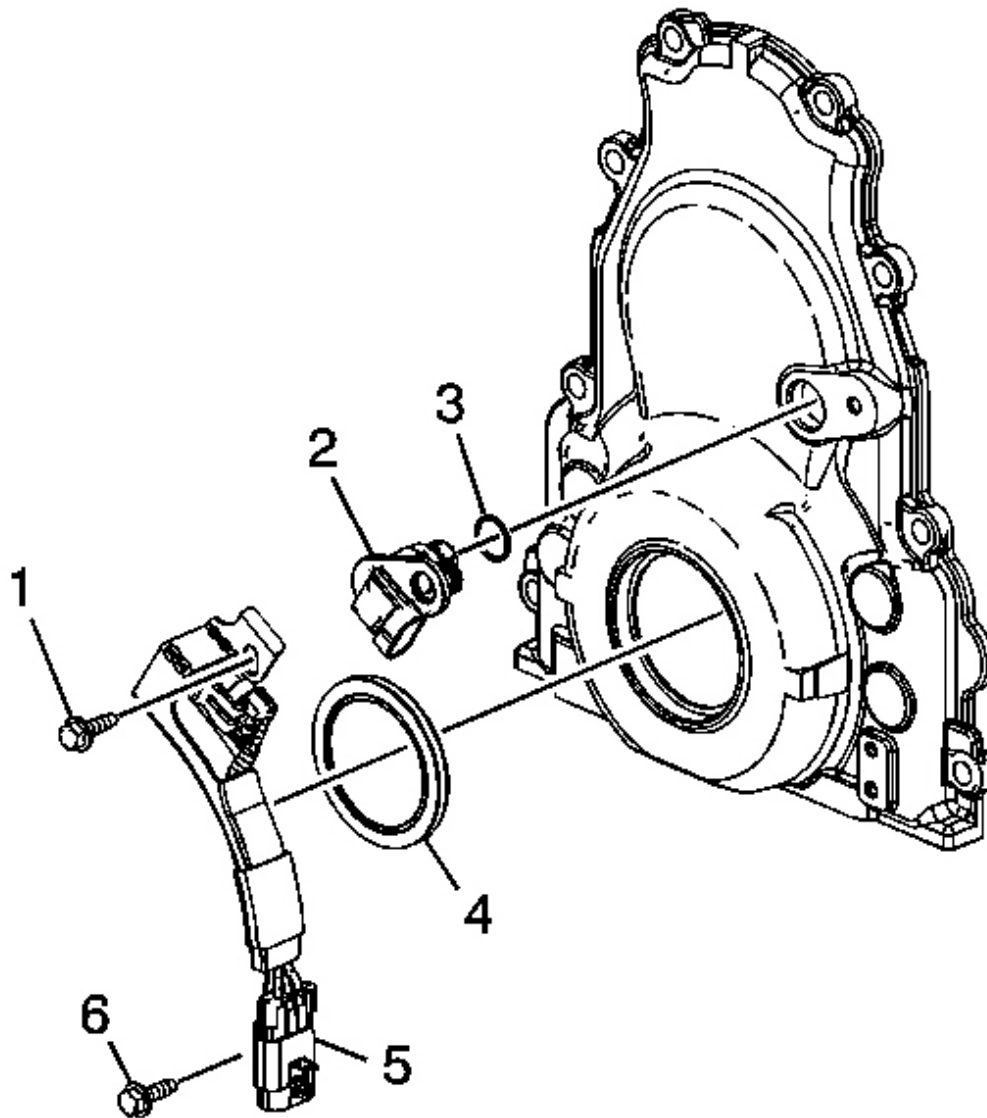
View Of Front Cover, Oil Seal, Camshaft Position Sensor, Bracket & O Ring
